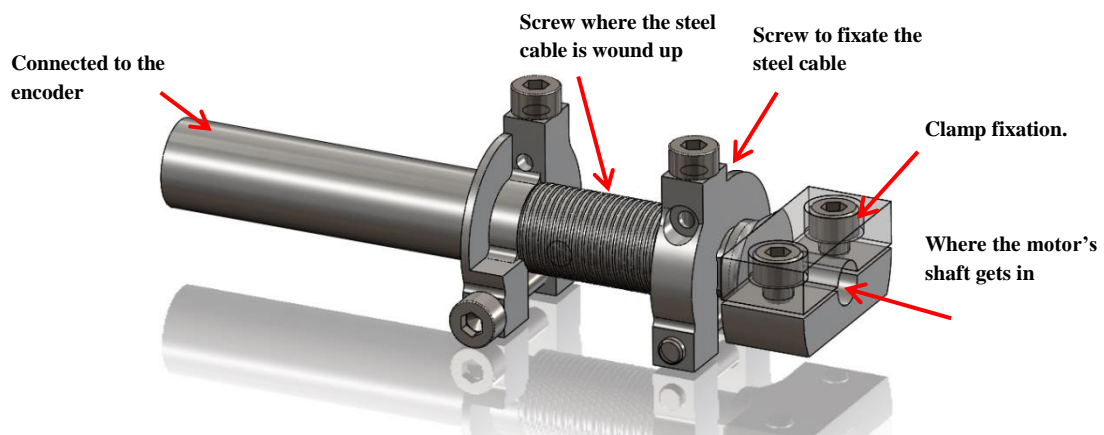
CAD drawing of the Capstan mechanism, adapted from Boerefijn and Heij's .
